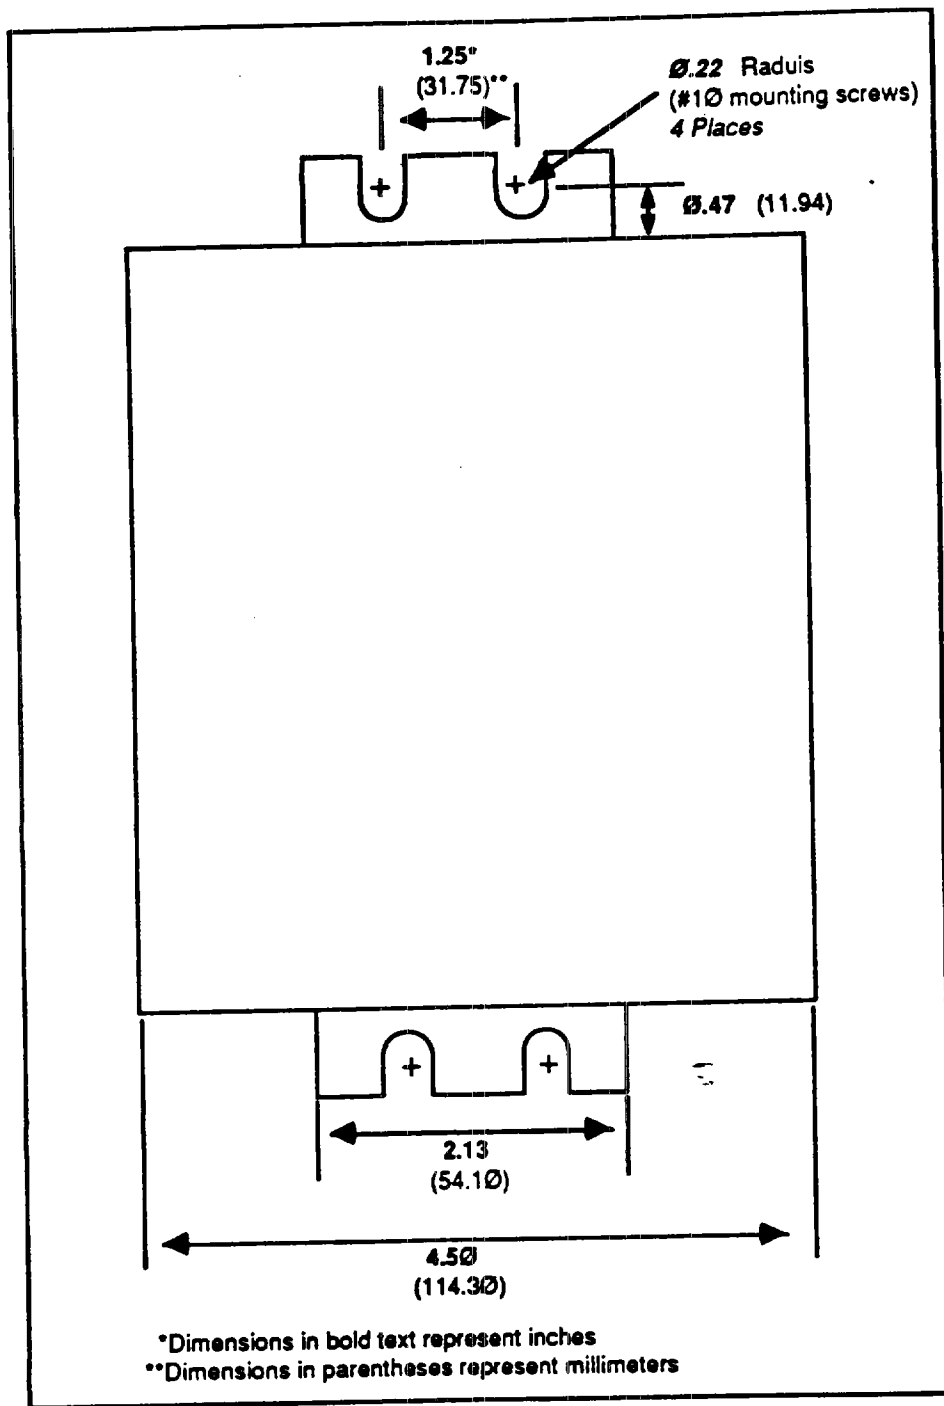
Decoder Box Dimensions (Minimum Depth Mounting)
